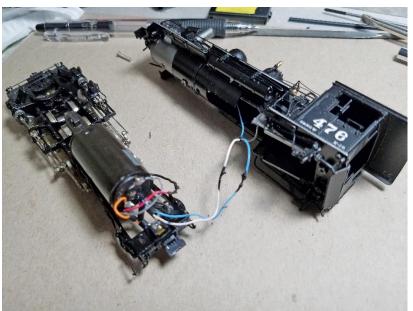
The wiring of the locomotive is completed, with the top of the 6-pin connector visible. The clearance when reattaching the boiler to the frame was very close.
